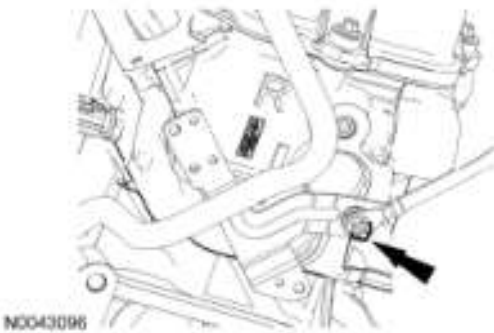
Locating CHT Sensor Jumper Wire Retainer
